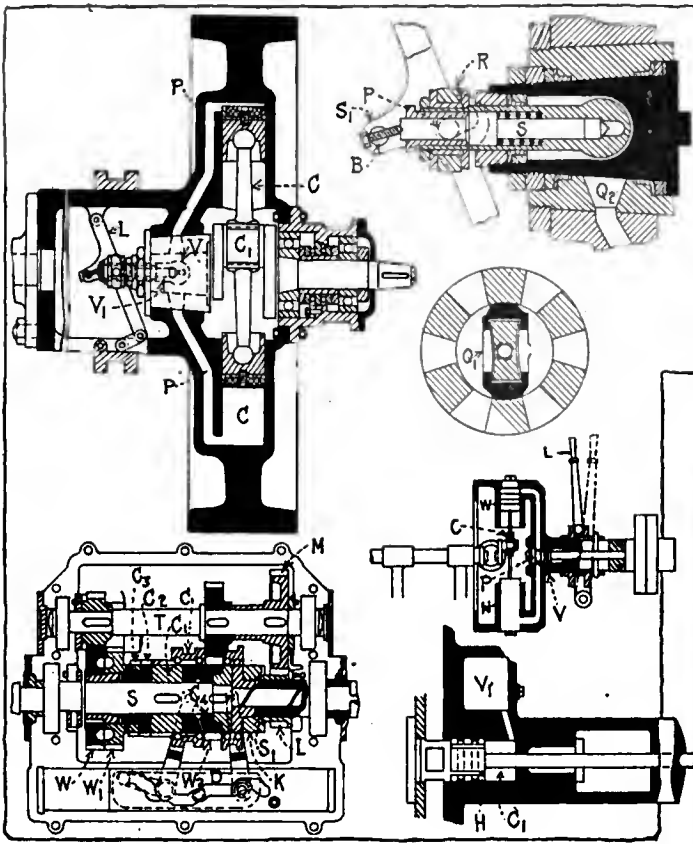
Stokes hydraulic clutch. Fig. 19—Bond gearset. Fig. 20—Jones hydraulic clutch. Fig. 21—Fouches refue cart. Fig. 22—Rolls-Royce rear axle unit
